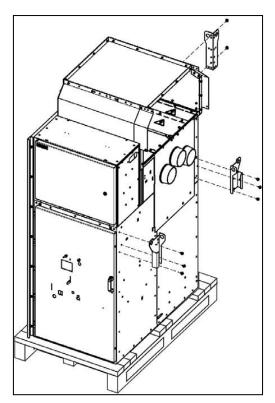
Example for a panel with end wall: 3 craning angles with 3 or 2 bolted joints M8x20 each
